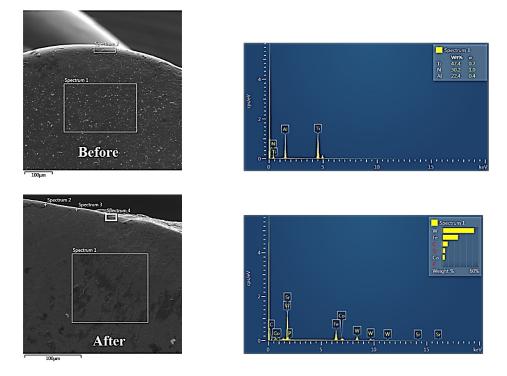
EDX analysis of coating layer on cutting tool used in dry machining
